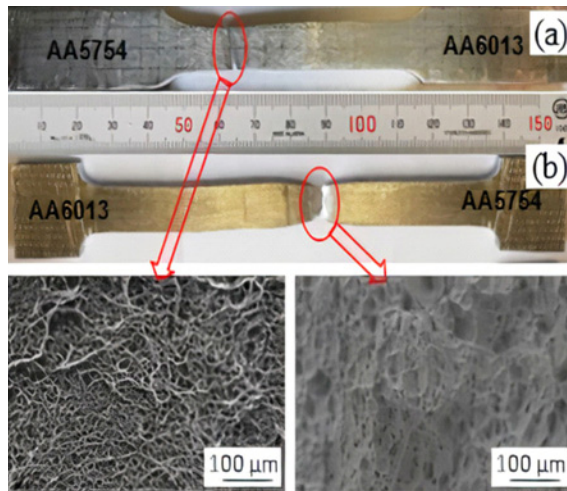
Fracture behaviour of welded tensile test samples: (a) GMAW, (b) FSW.
